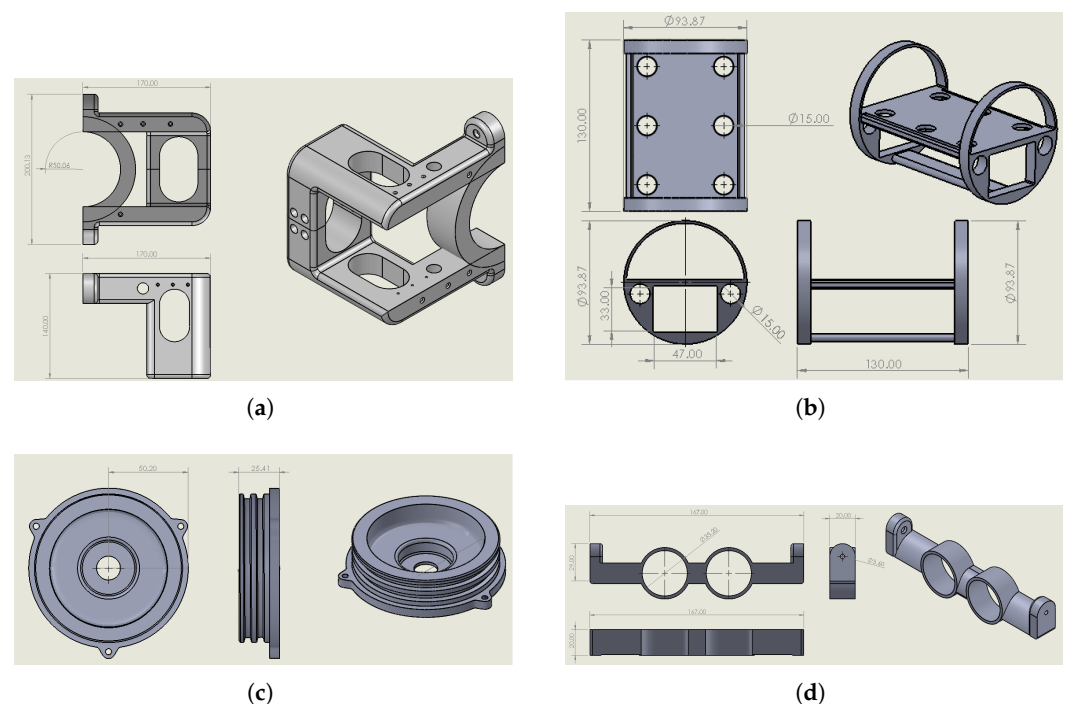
Three-dimensional-designed parts of the ROUV's body: (a) Exterior body piece used to hold the WTC. (b) Component holder to house the components inside the WTC. (c) End-cap design to seal the WTC. (d) Syringe holder design.
